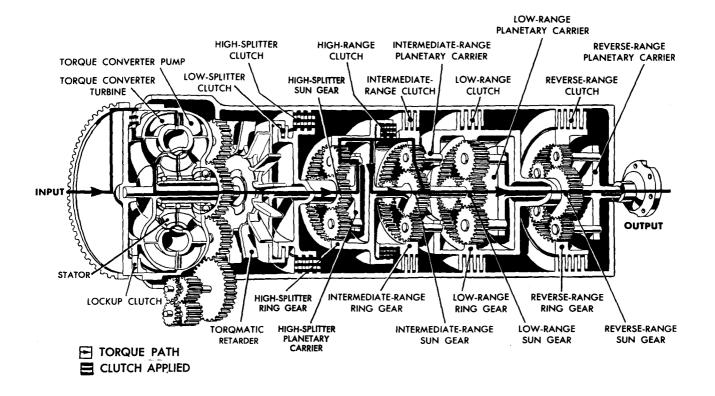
Fourth gear (5640, 5840), sixth gear (5660, 5860), high splitter, high range, lockup-torque path
